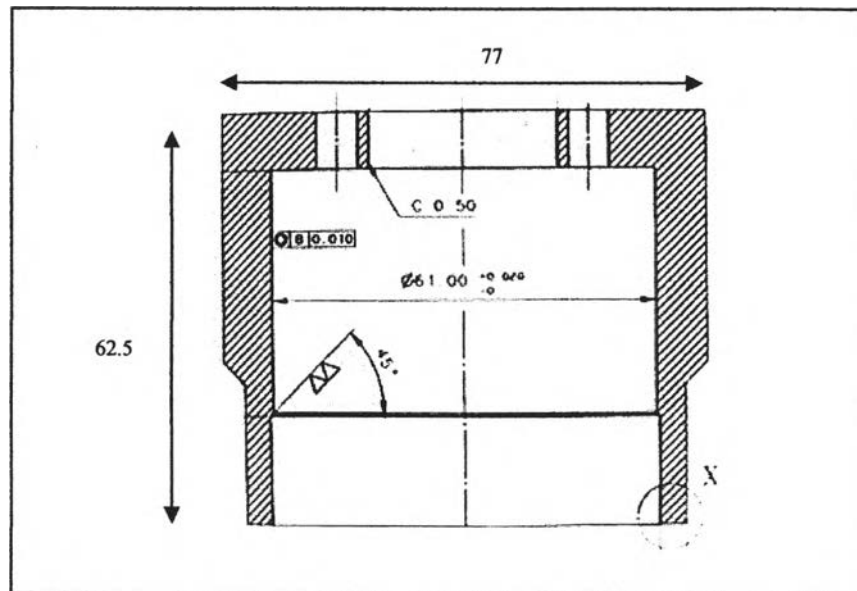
Drawing of Punch Cutter 202 SPOE
